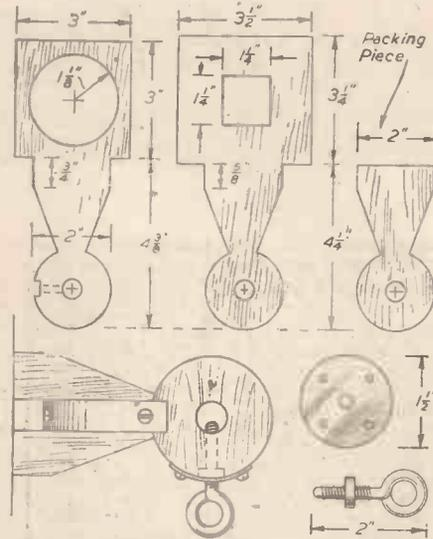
Lamp house base, support and packing piece, with details of adjustment screw.
